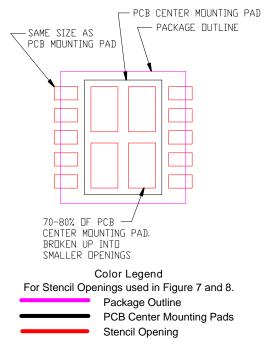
Typical for 0.5 mm Pitch or Greater DFN/QFN Package with Stencil Openings Shown Over PCB Mounting Pads
